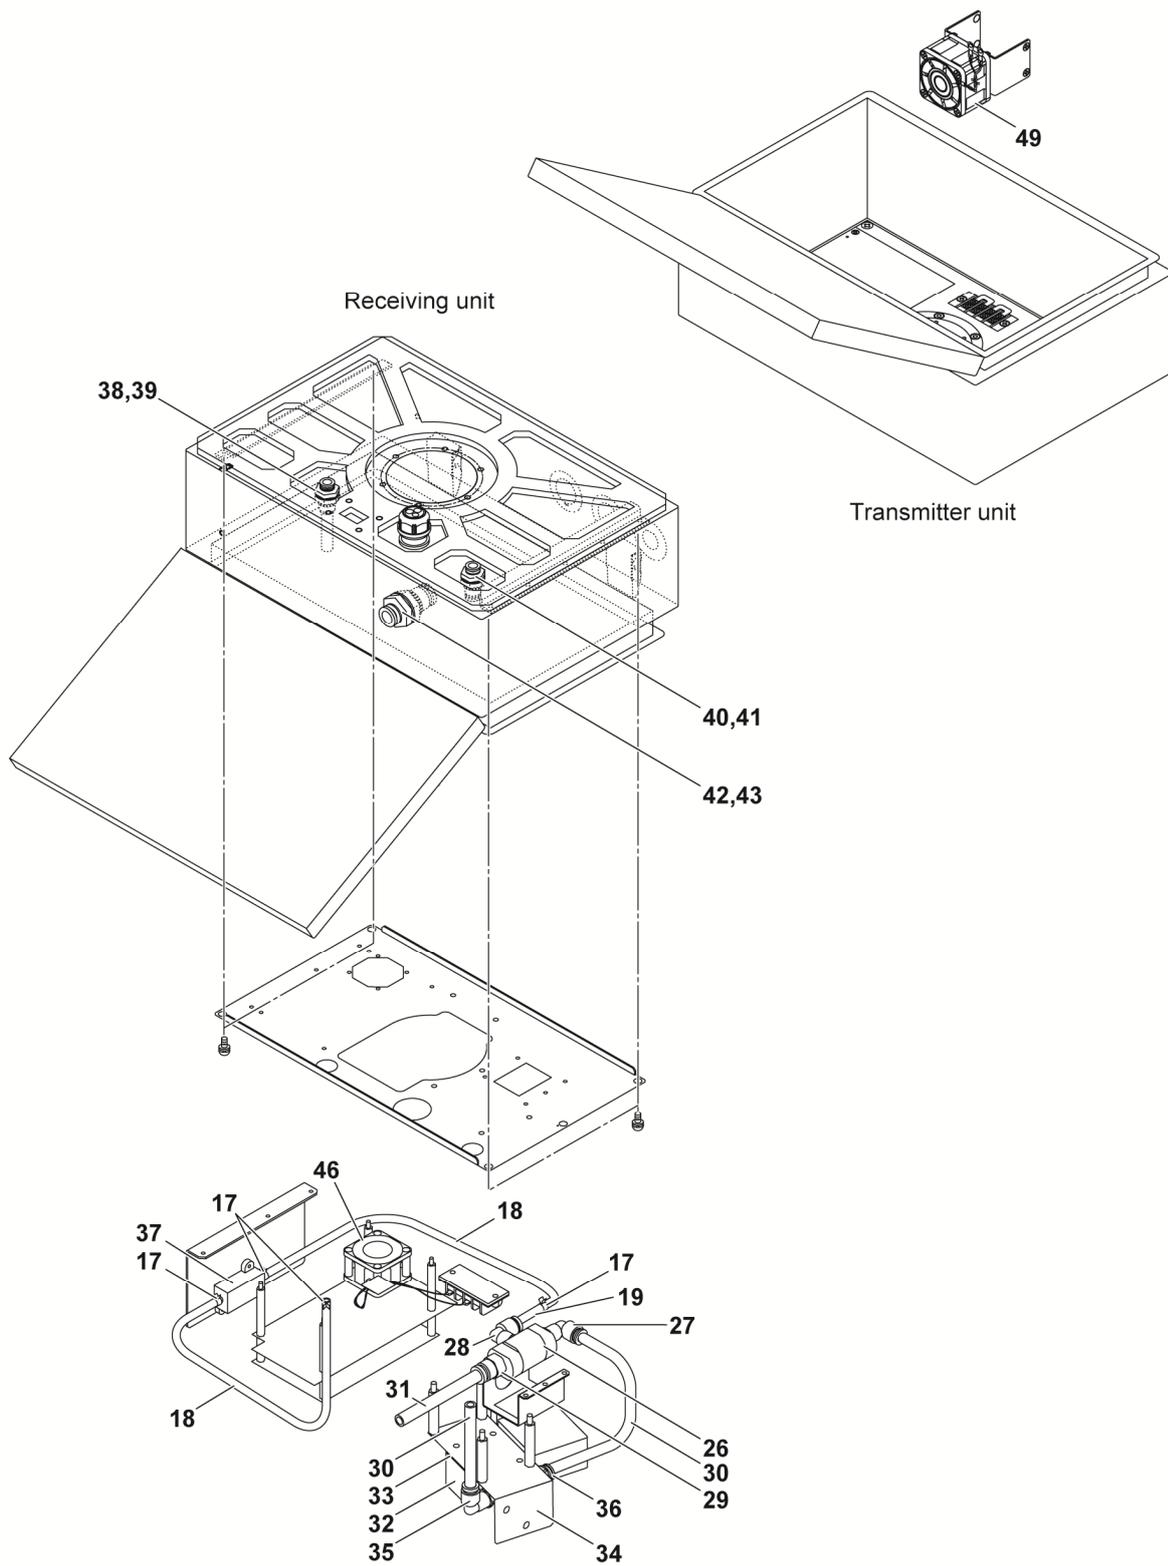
Exploded view of the transmitter unit and the receiver unit
